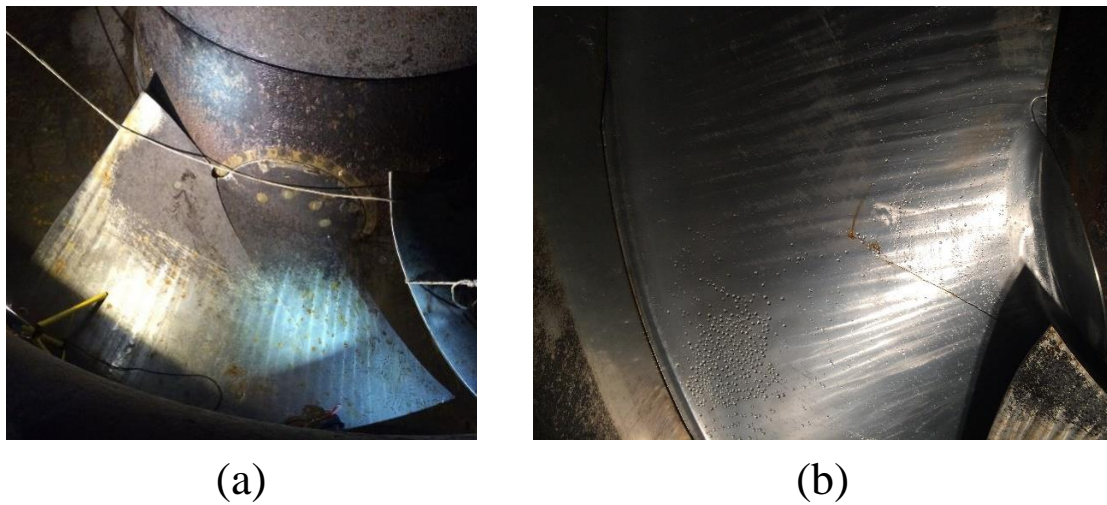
View of the blade with crack. (a) Pressure side. (b) Suction side.
